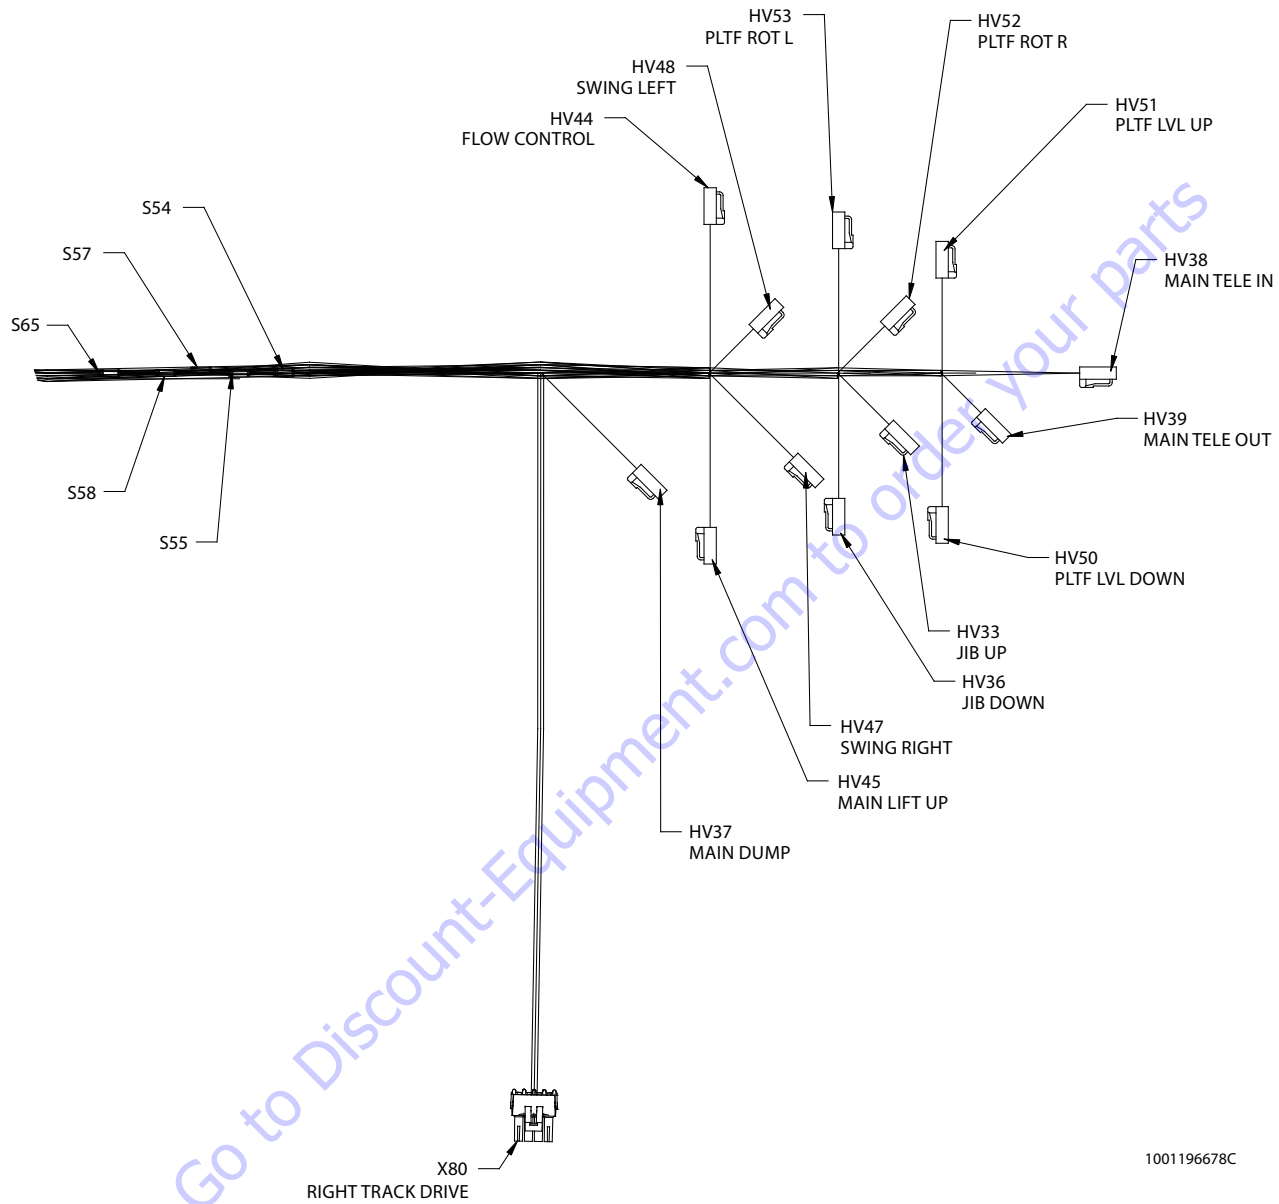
400SC Main Valve Harness - Sheet 3 of 6
